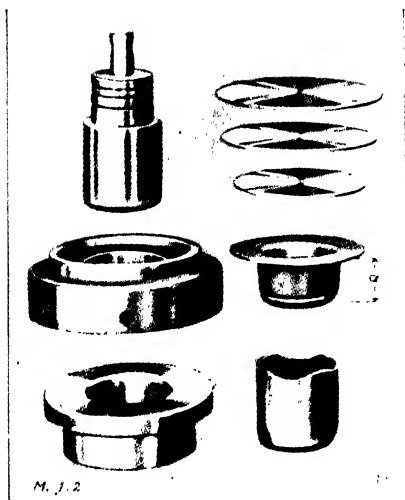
Left* : Set of first-operation tools for deep-drawing a standard cup in the Erichsen machine.
